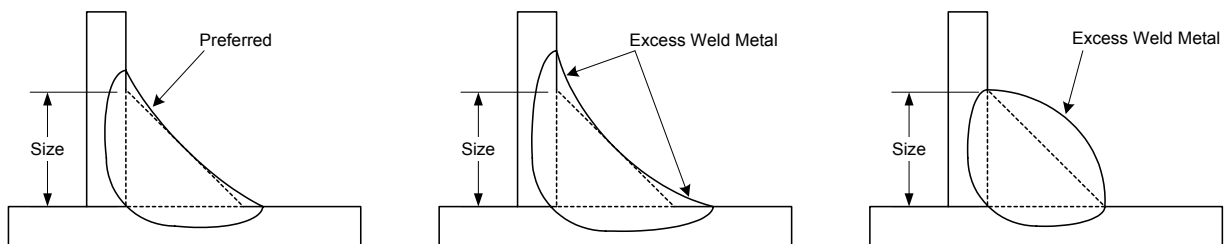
Preferred shape of fillet welds (Degarmo 84)
